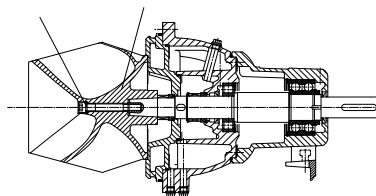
Removing D impeller from pump with bearing bracket S05/S06
